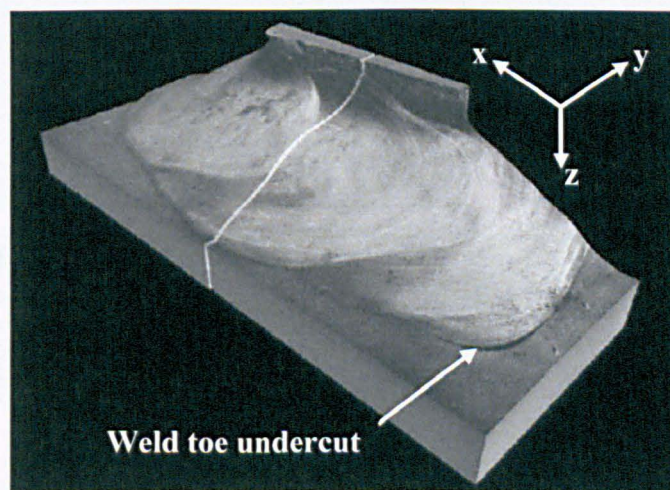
Weld return showing an approximate overview of the weld model, and location of weld toe undercut.
